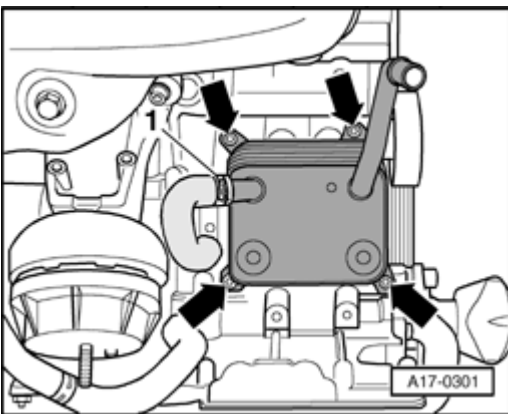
Disconnecting Coolant Hose From Oil Cooler & Removing Bolts And Oil Cooler
